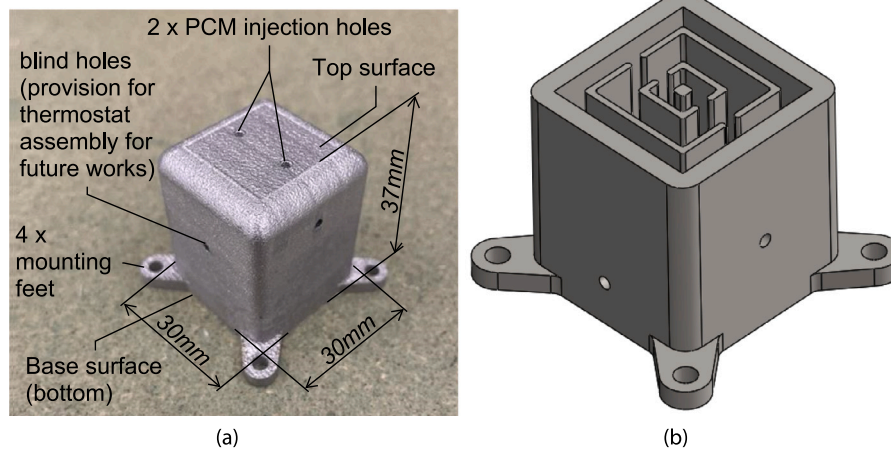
Picture of the heat sink utilised in the experiments (a) and section view of CAD drawing (b).
